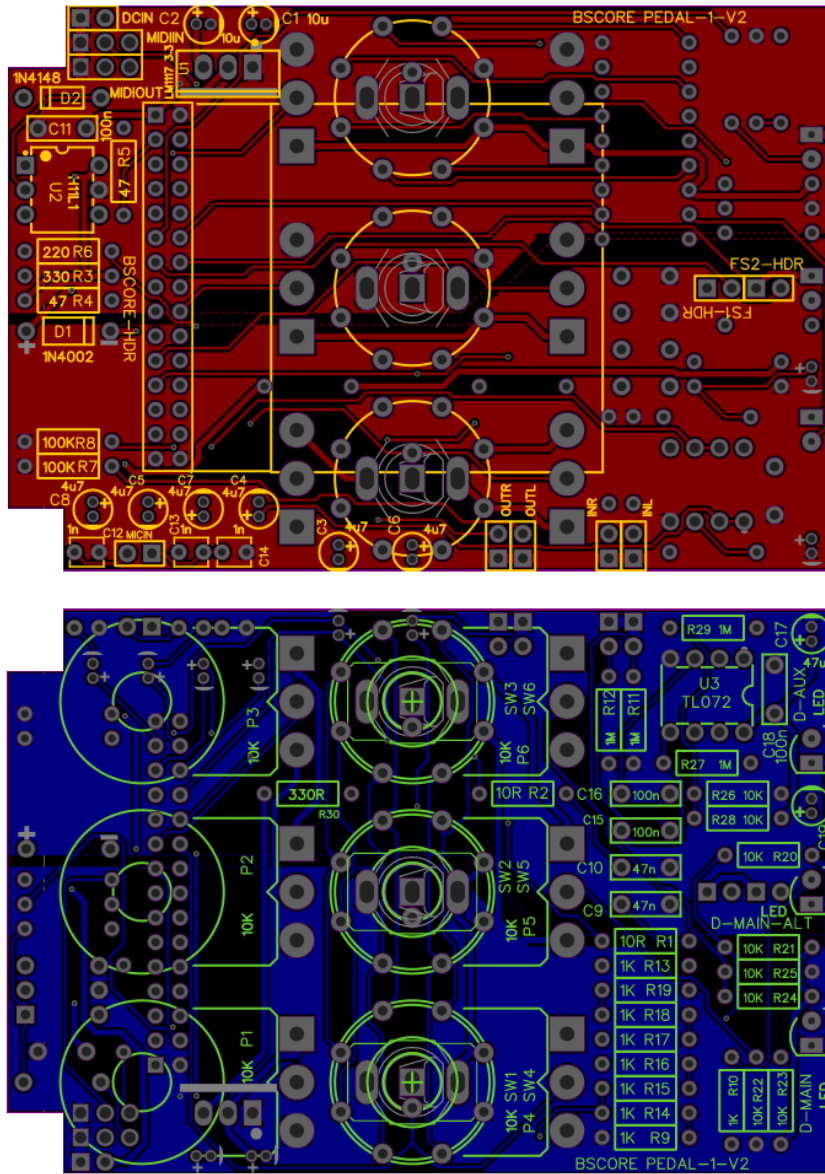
BGPM-1 PCB (Upper: TOP SIDE, Lower: BOTTOM SIDE)
